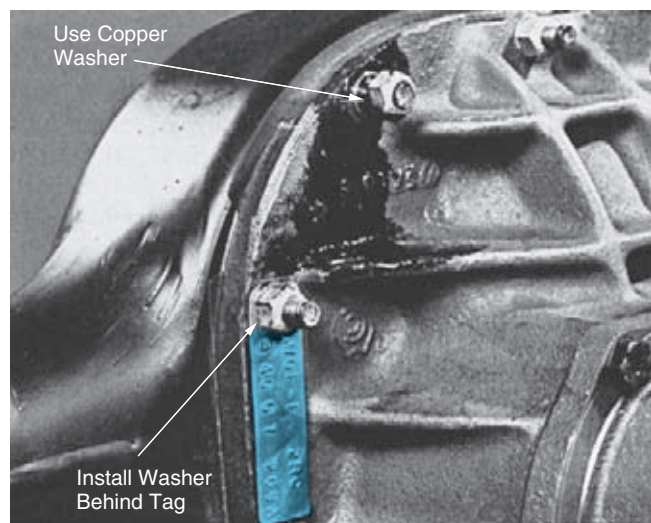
After removing the axles, this carrier can be detached by removing the nuts and copper washers and lifting the carrier housing from the axle housing. (Courtesy of Ford Motor Company)
